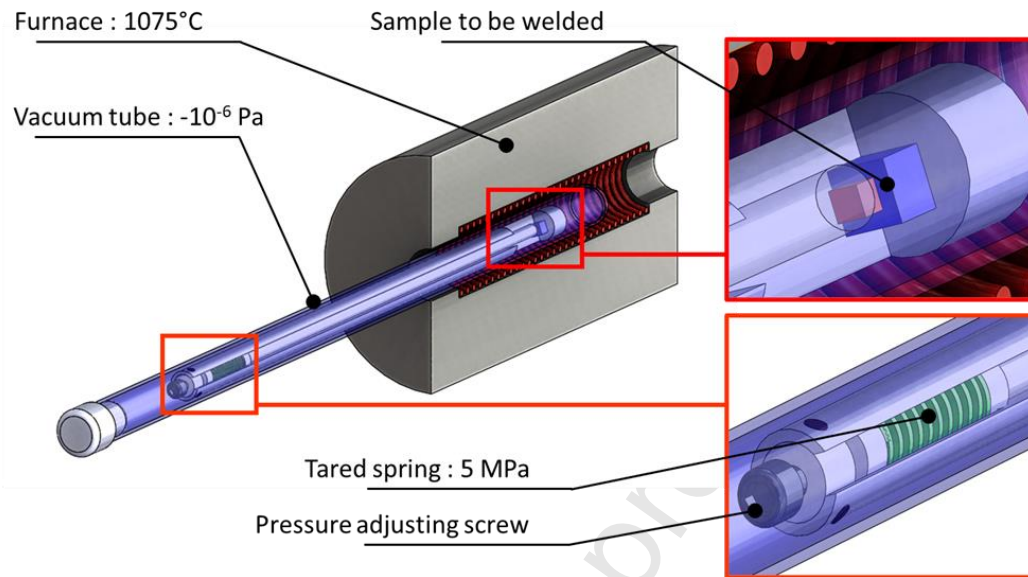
Home-made diffusion welding set-up showing the various components of the welding bench.
